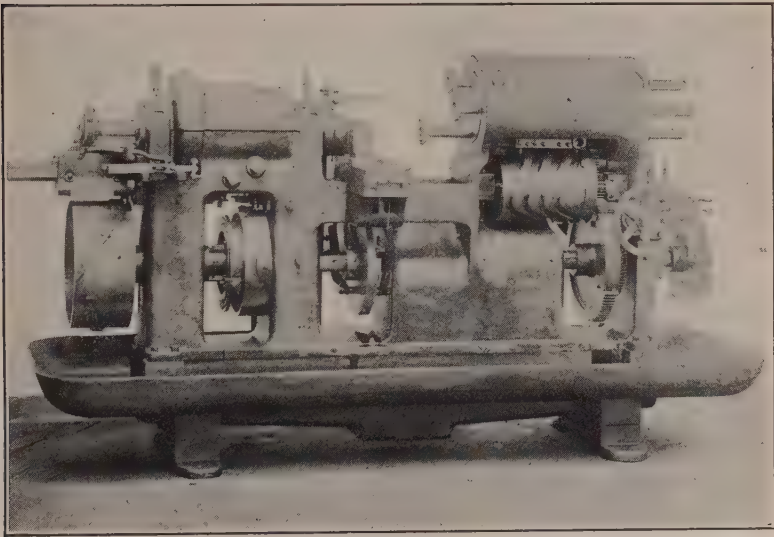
A Modern Version of the Spencer Type Automatic Screw Machine, built by the Hartford Machine Screw Company.
